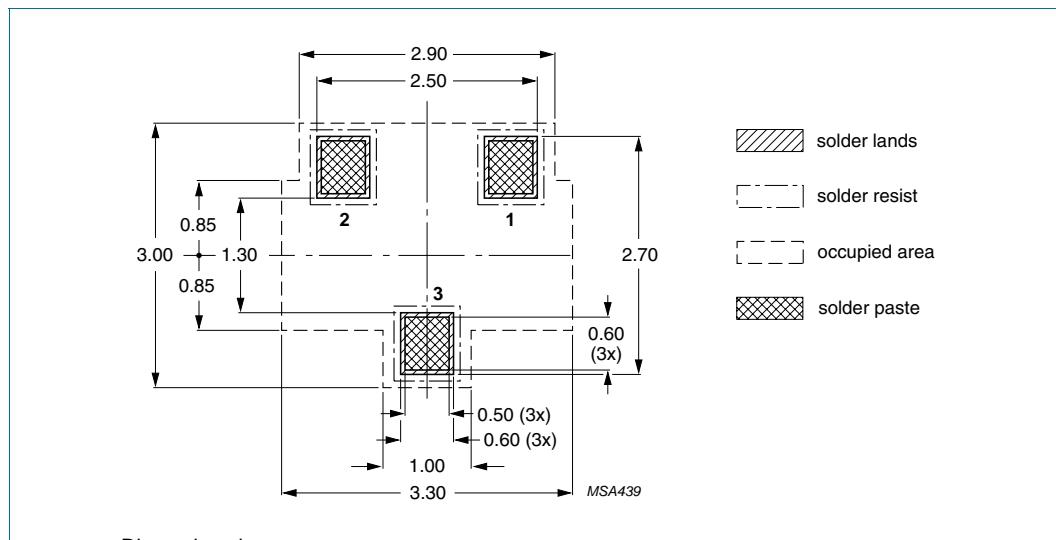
Reflow soldering footprint SOT23 (TO-236AB)
